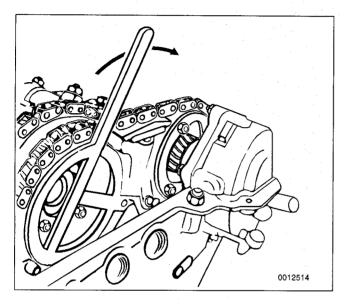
On VANOS control unit with spring plate (cars built 3/95 and later), rotate exhaust camshaft sprocket clockwise until intake camshaft contacts stop. BMW special tool 11 5 490 shown.
